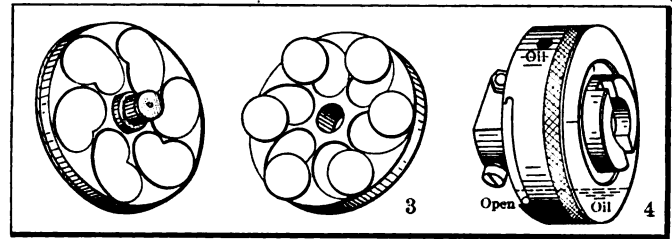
Coupling plates with steel balls. Fig. 4—The complete coupling between armature shaft and motor, allowing automatic advancement of ignition by magnet
